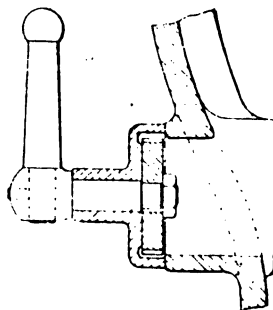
Sectional Detail of Eccentric Movements and Locking Pin in Figs. 8 and 9.
